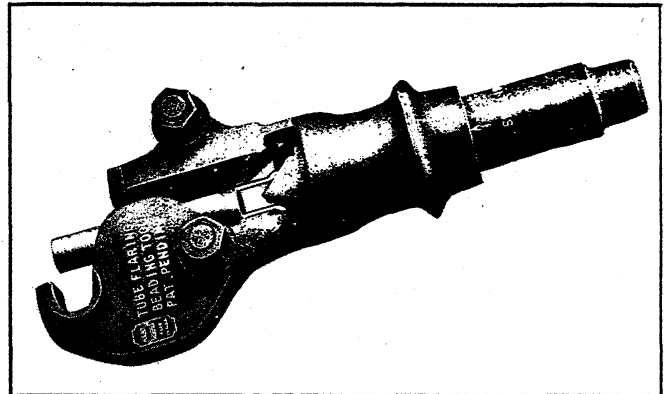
Hydraulic Brake Tube Double Flaring Tool
